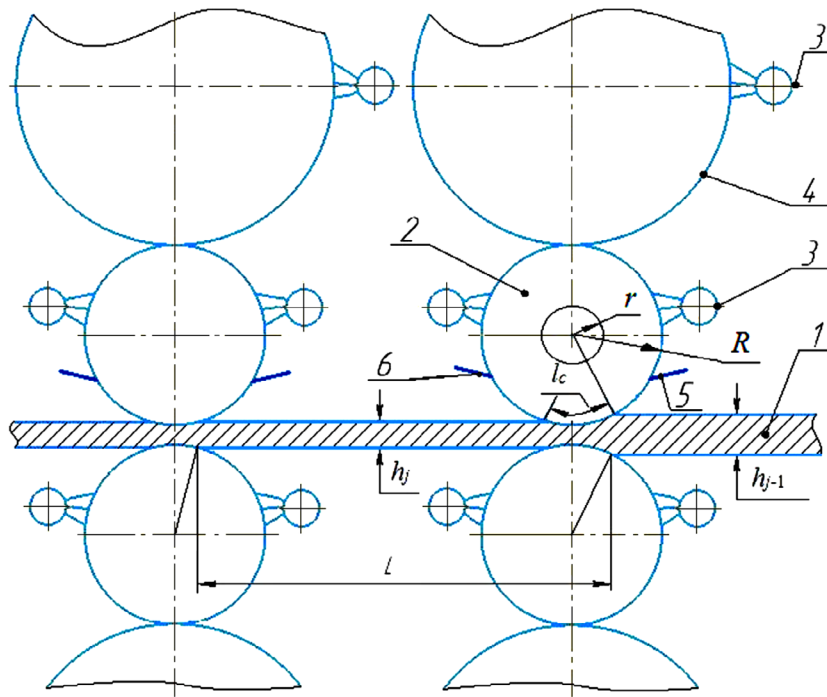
Scheme of hot rolling and roll cooling in a four-high mill stand:
